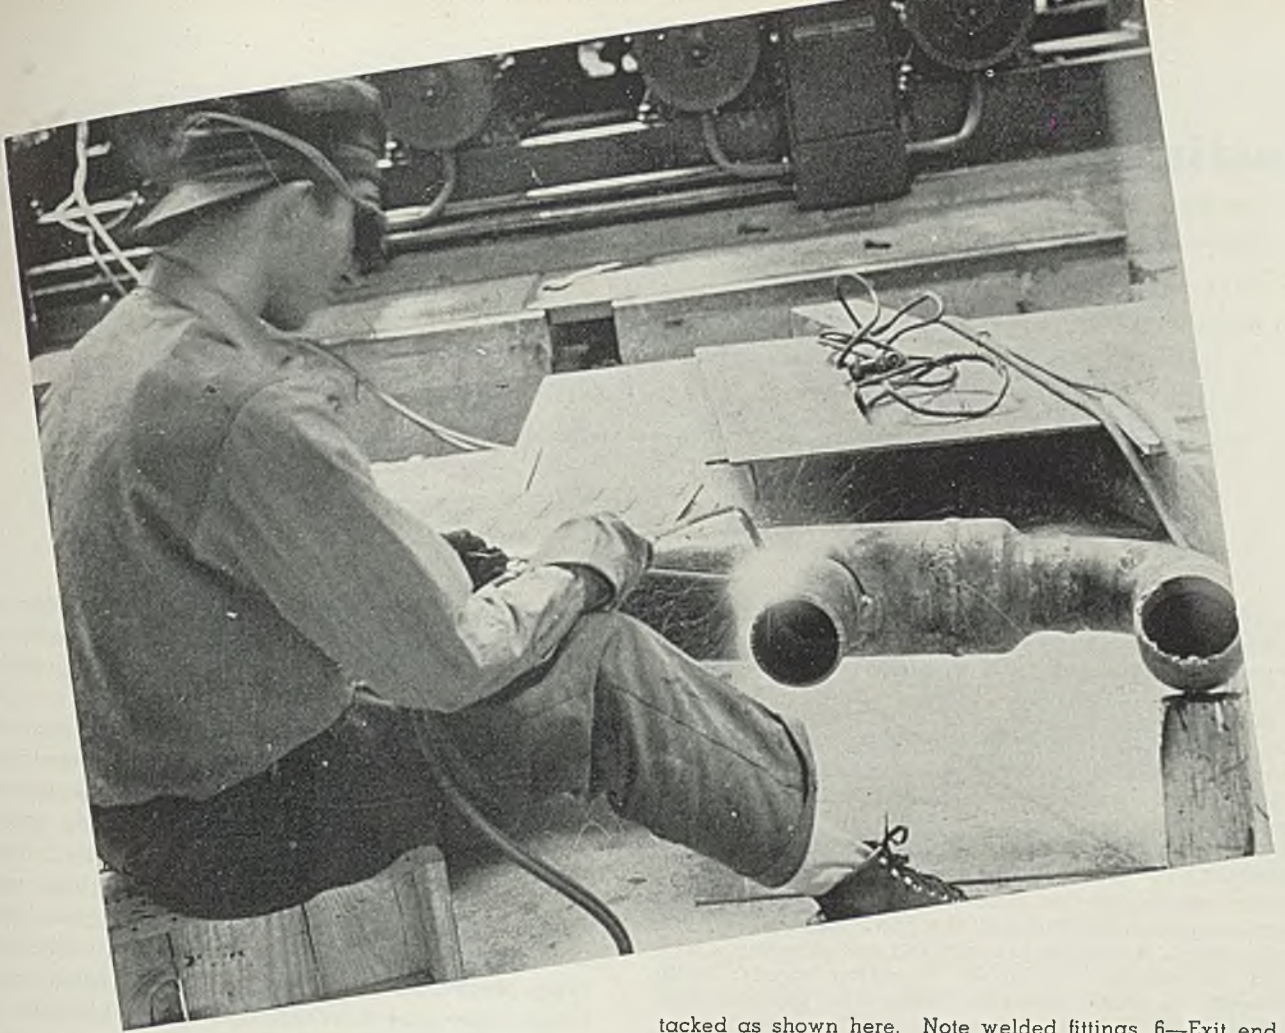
Above, low-pressure steam piping tailored to fit in a centrally located point of the job. Operator is welding up an assembly. 2—Closeup of operator making position weld on 24-inch water supply line. 3—Pipe tunnel, showing water, steam, air and oil lines—all gas welded. 4—Closeup of L, part of the 24-inch manifold assembly. 5—In tailoring low-pressure steam piping, it is first cut to size and
